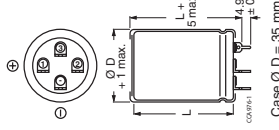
Printed wiring pin version Case Ø D = 35 mm
